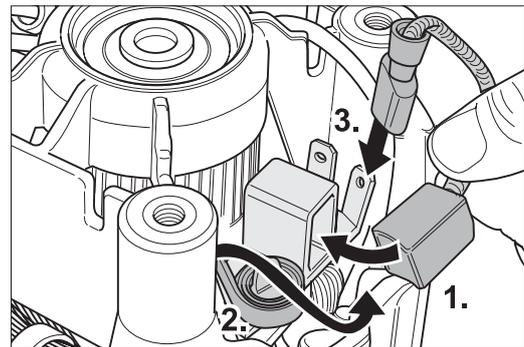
Insert the new carbon brush, turn back the brass pressure clamp and attach the connector.
